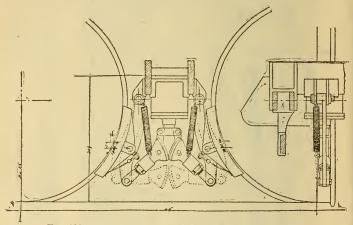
STANDARD AIR BRAKE FOR DOUBLE TRUCK CARS.
